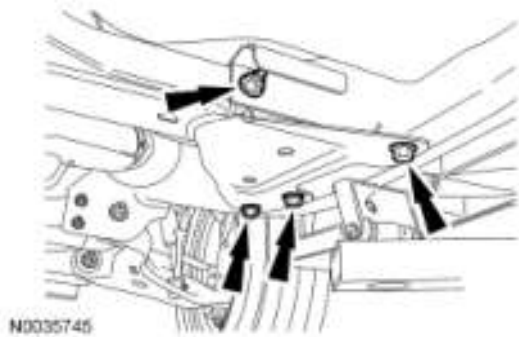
Locating RH Side Crossmember Bolts And Nut
